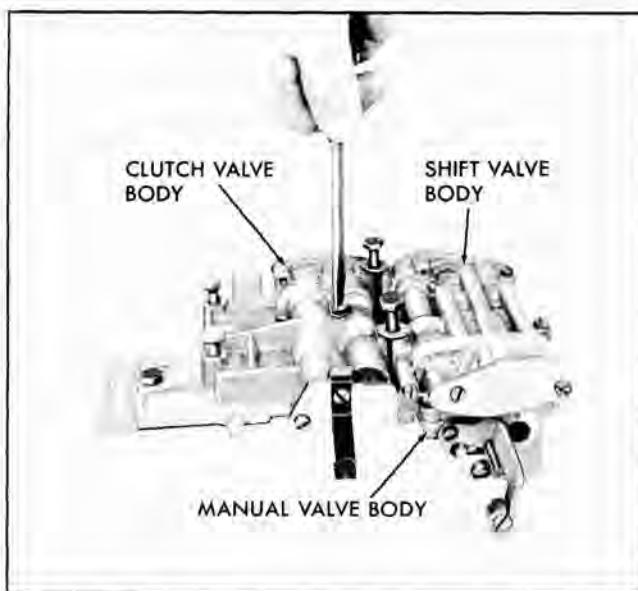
Tightening Shift Valve and Clutch Valve Body Attaching Screws
